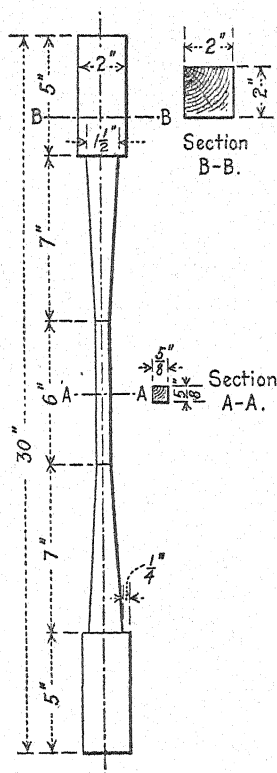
Details of Tension-Parallel-to-Grain Test Specimen.
